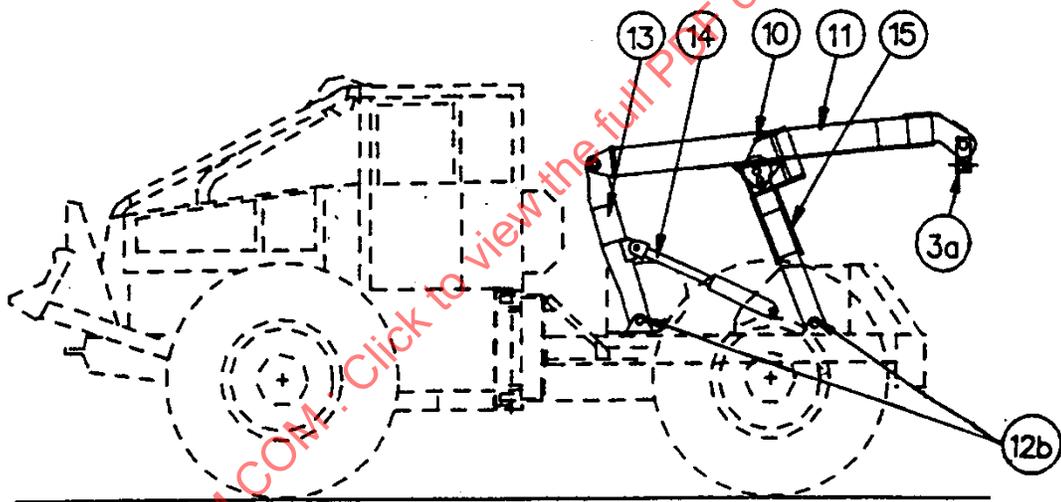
DUAL ARCH BOOM ASSEMBLY
